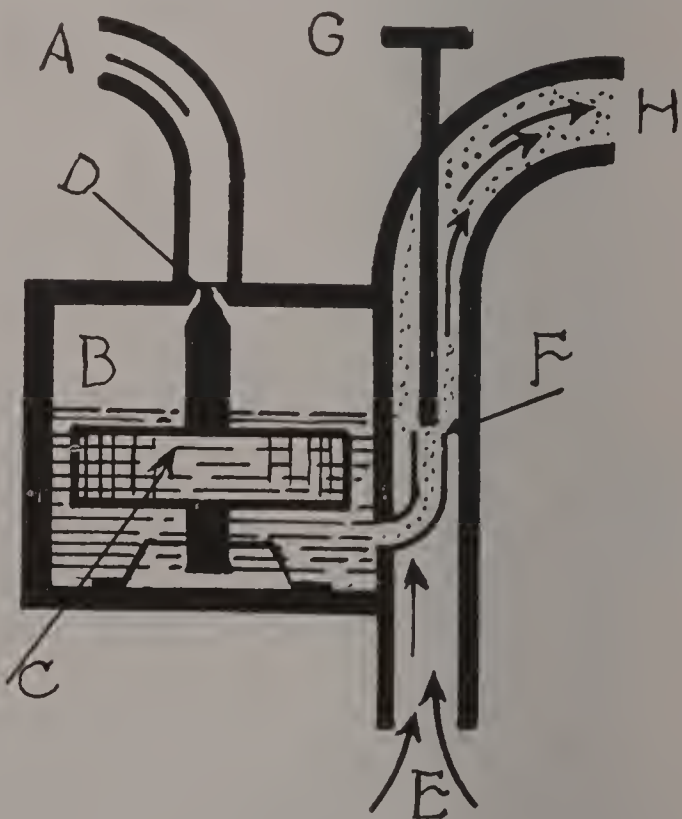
A—Fuel Feed Pipe; B—Carburetor Reservoir; C—Float; D—Fuel Cut-off Valve; E—Air Intake; F—Needle Valve for Adjusting Fuel Mixture; G—Needle Valve Thumbscrew; H—Manifold Going to Engine Cylinders.
